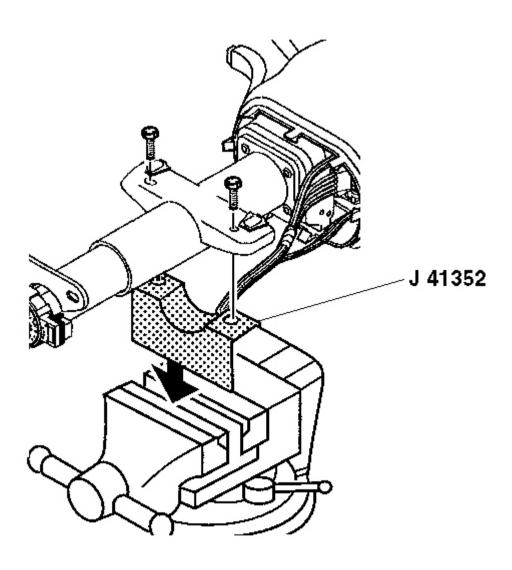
Installing Steering Column Onto J 41352 Courtesy of GENERAL MOTORS CORP.
